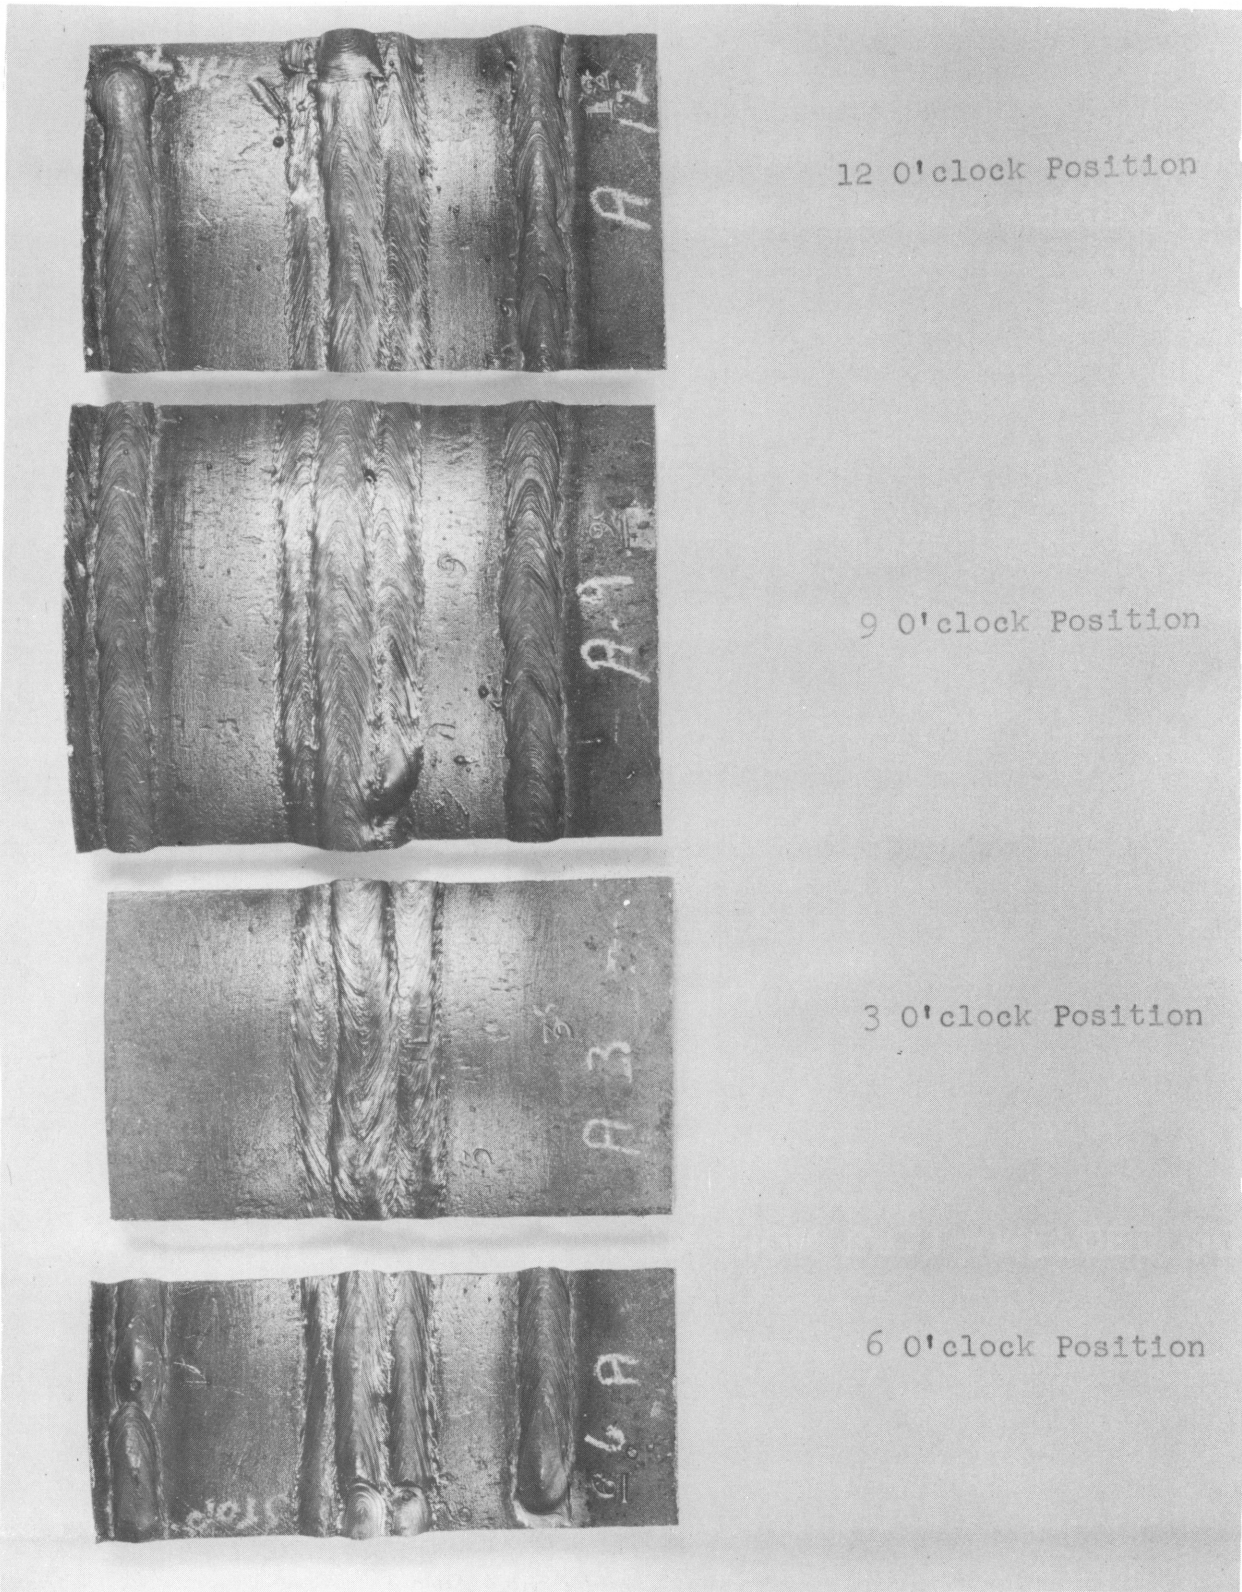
FACE BENDS OF SECTIONS FROM BUTT - WELDED JOIN
